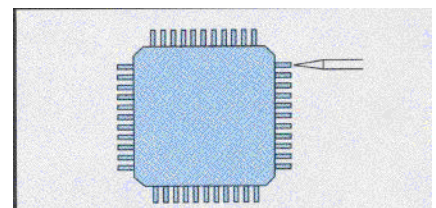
Keeping the iron tip parallel to the pins being soldered reduces solder bridges.
